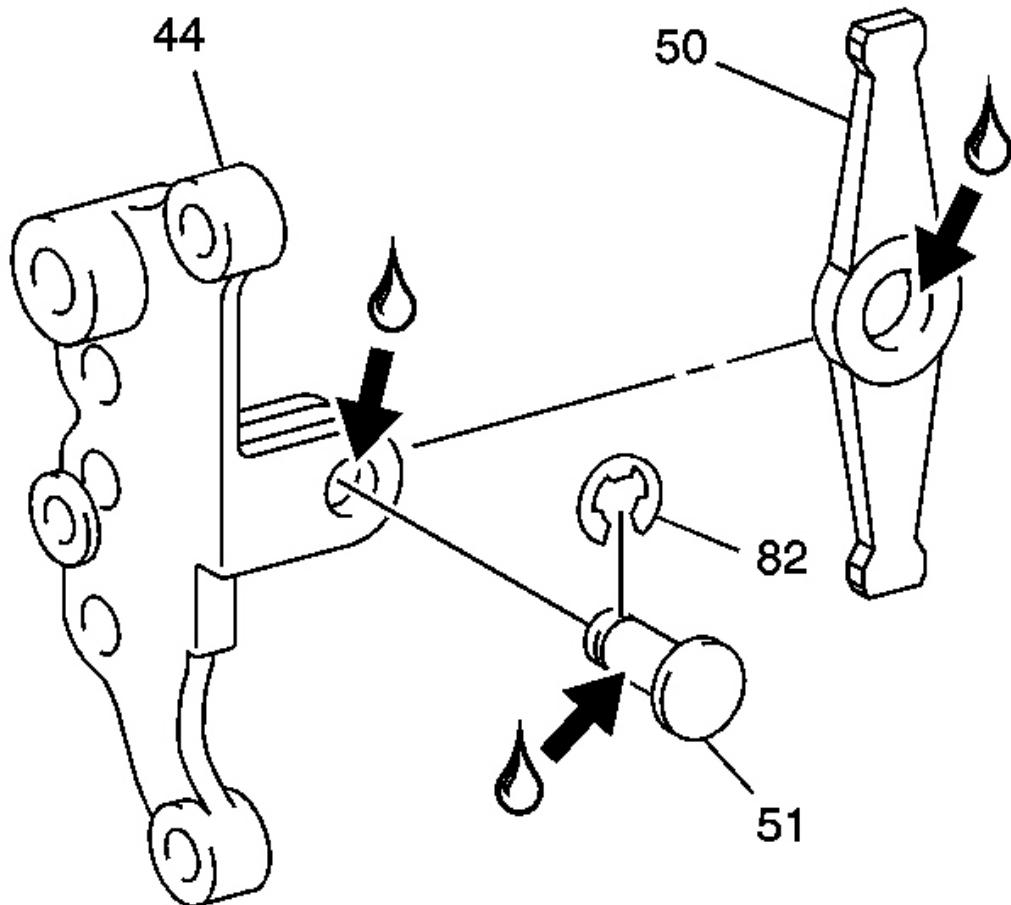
View Of Control Select Arm, Shift Control Lever Bracket, Control Select Arm Pin & E-Ring
